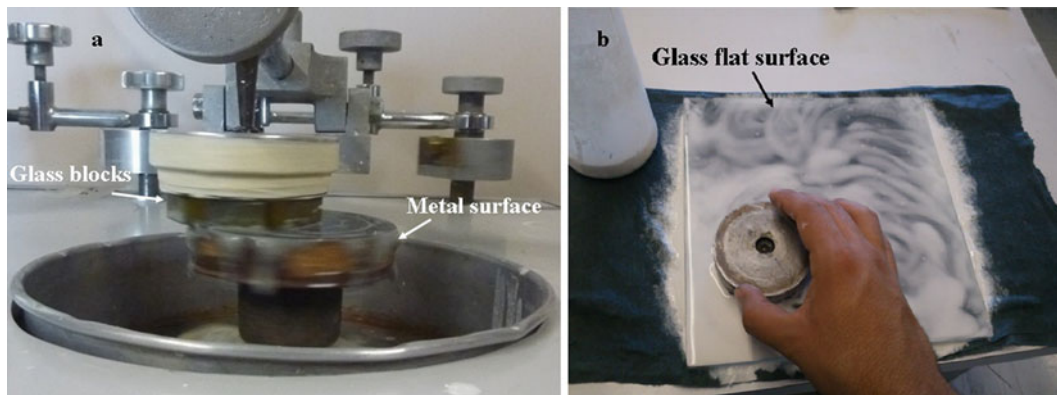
(a) Grinding made with a polish machine fabricated by CIO technicians. (b) Fine grinding over a glass surface
